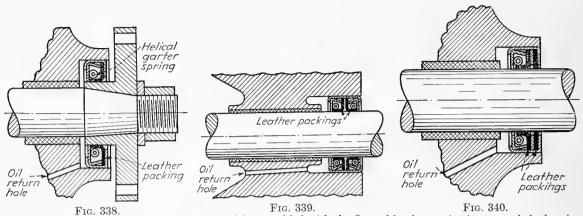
For retaining lubricant, the seal is assembled with the flanged leather projecting toward the bearing. The leather packing is clamped near the outer edge of the flange by the inner of two telescoping metal cups, a tight joint at the face being thereby assured. A garter-type spring compresses the leather about the shaft. Should misalignment occur, the seal is maintained by virtue of the flexibility of the leather and garter spring. To drain off the surplus oil passing the end of the bearing, a small hole is drilled in the casting connecting the reservoir.
